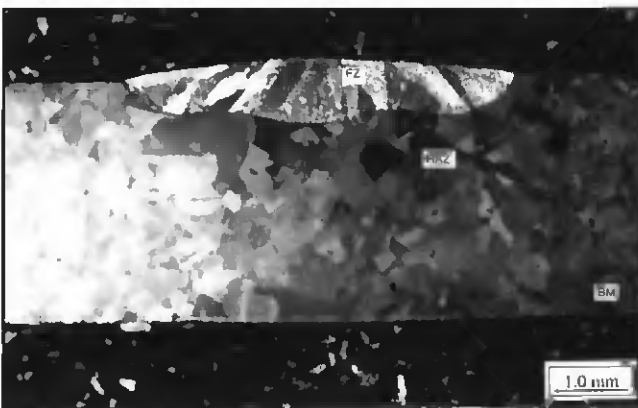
The shape of the fusion zone of Ni-270 (with Fe) GTA weld at 5 g.
